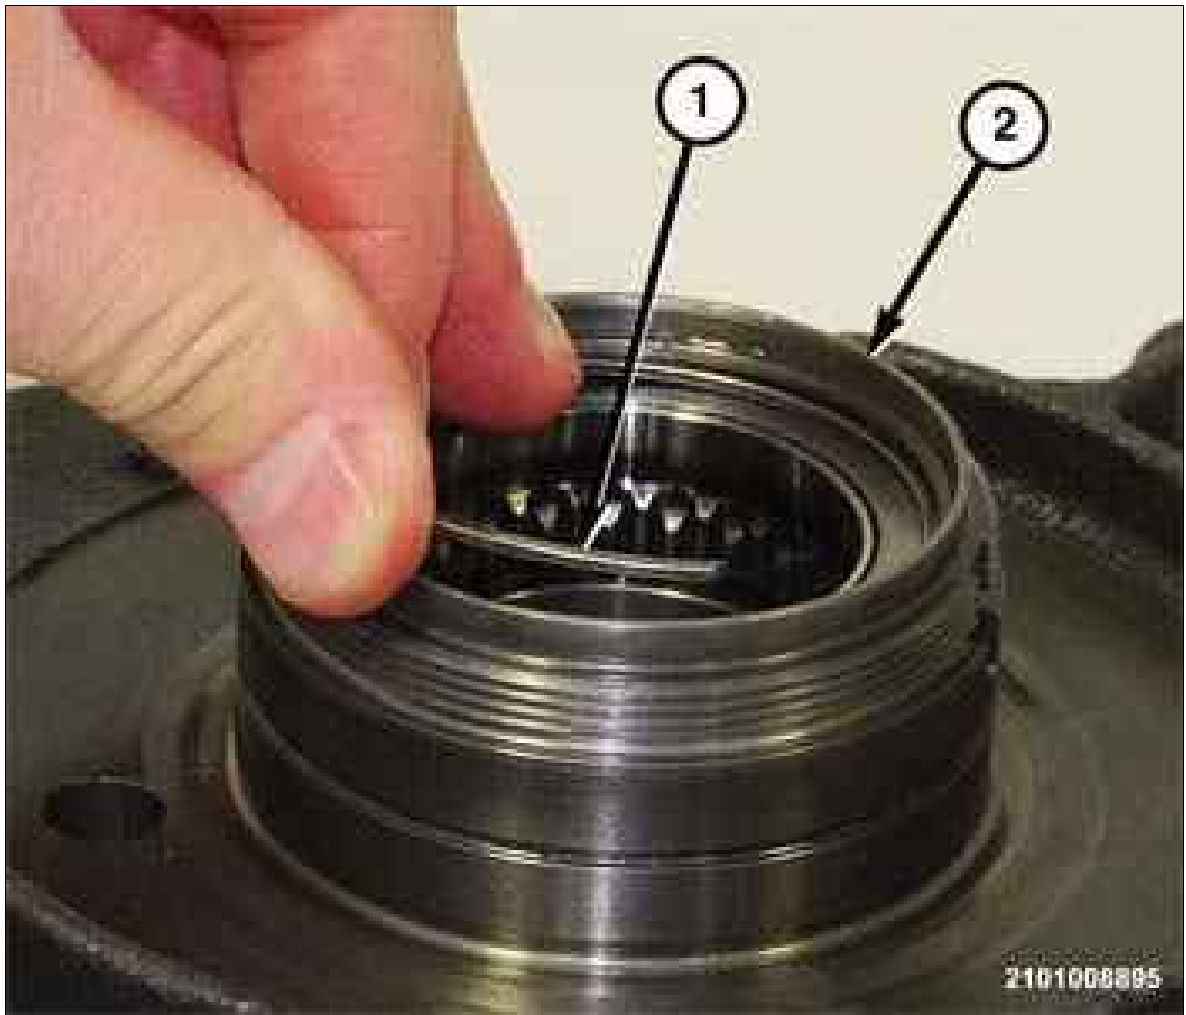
Pushing Dog F-Clutch Plug To Bottom Of Bore
